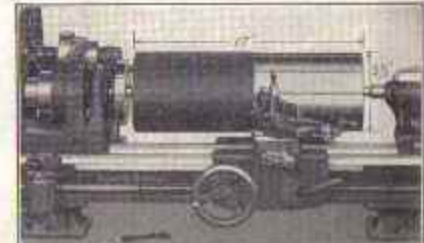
9-inch x 3-ft. "Workshop" Lathe Takes Work 8 1/2 inches in Diameter and 17 inches Long Over the Tool Carriers
